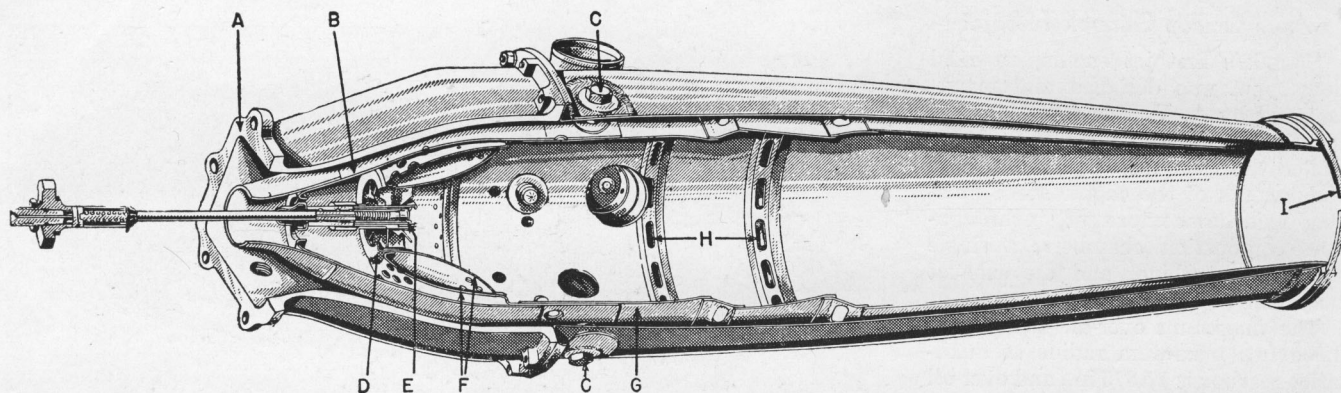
A cutaway view of the Goblin combustion chamber. The unit bolts to expansion chamber at A, upstream end. Concentric flame tube B is held in place by three pins—two showing at C—that are attached to the outer casing, but allowed to slide in sockets in flame tube for radial expansion. The burner has swirler D round the fuel nozzle E and metering holes in caps F through which about 20 per cent of the air from the compressor enters the combustion chamber. The remaining 80 per cent goes through annulus G and is metered into the chamber through ports H. The downstream end of the chamber is attached to nozzle junction by expansion joint I.
